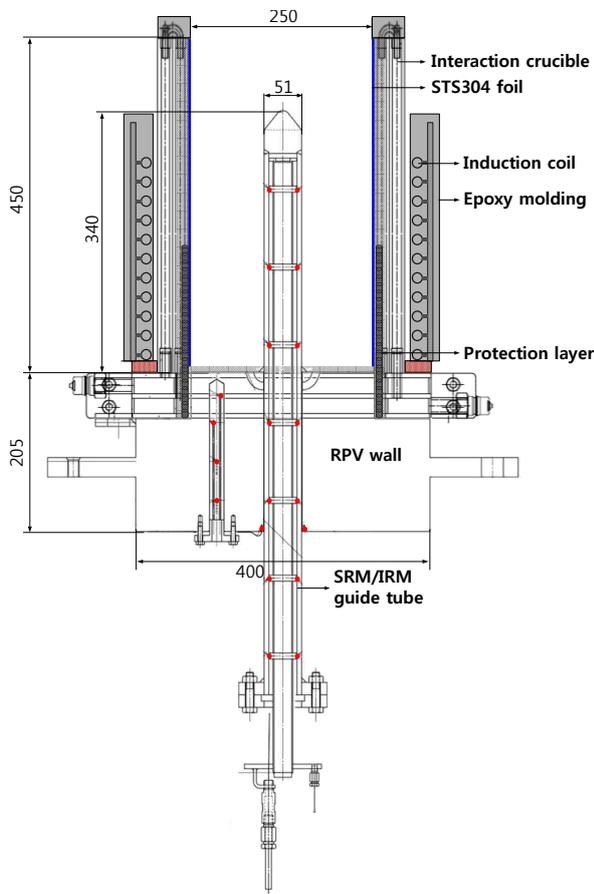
Assembly of a SRM/IRM guide tube specimen and interaction crucible.
